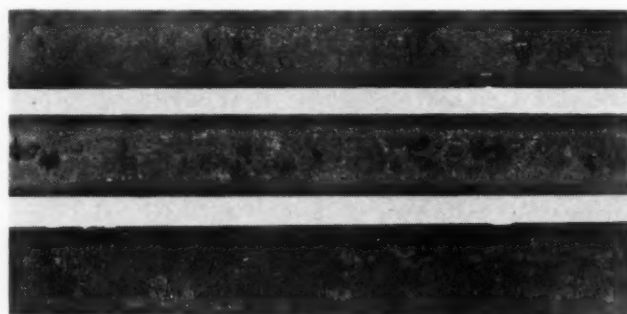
ACTION OF CORROSION FATIGUE ON OIL-WELL SUCKER RODS
